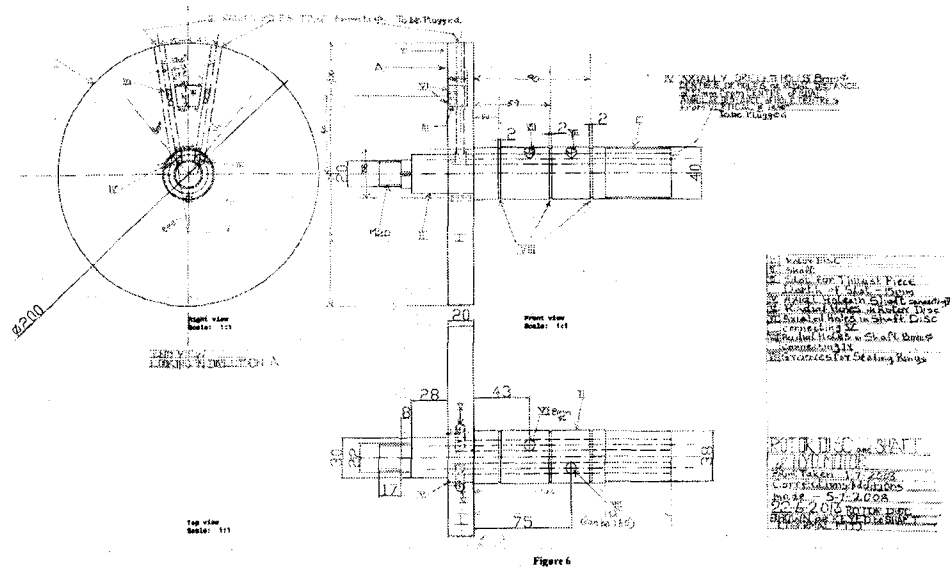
Rotor Disc and Shaft of Hydraulic motor
